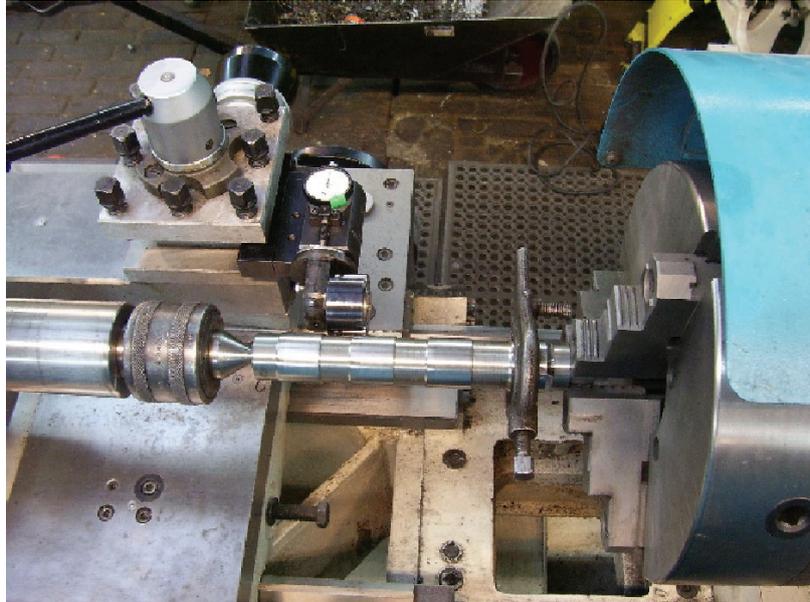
General view of OUPN tooling system (machine, grip, object, tool): burnishing
